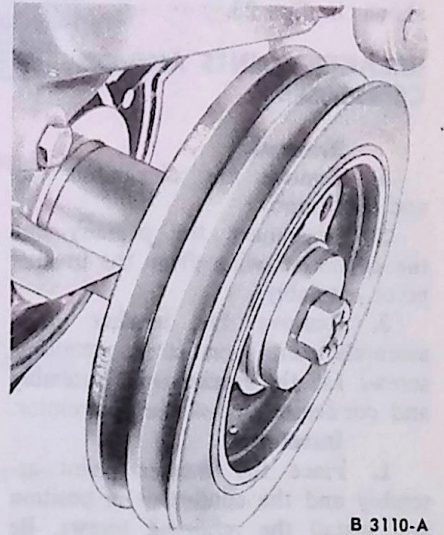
Typical Engine Timing Marks—Pulley Mounted
